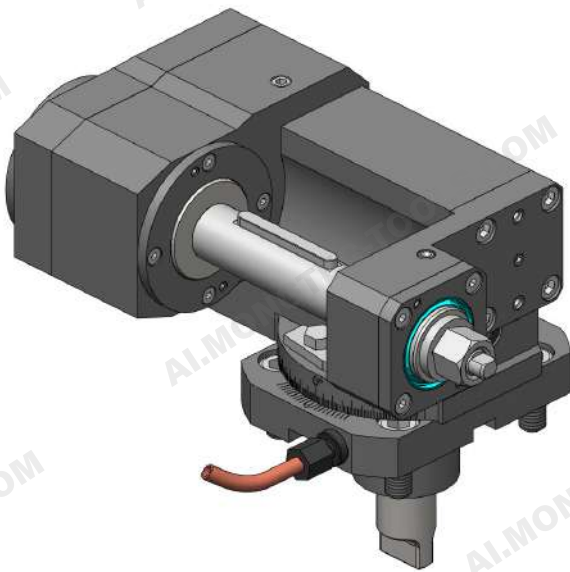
example: adjustable driven tool $\pm 90^\circ$
